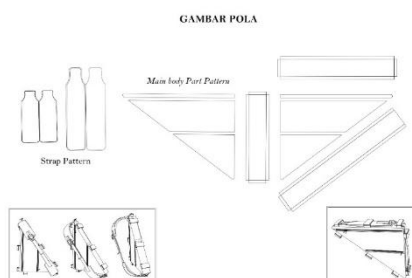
Pattern drawing of the detachable triangular bikepacking bag (strap pattern and main body part pattern)
